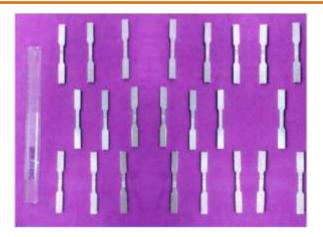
Tensile specimen prepared from friction stir welded joints
